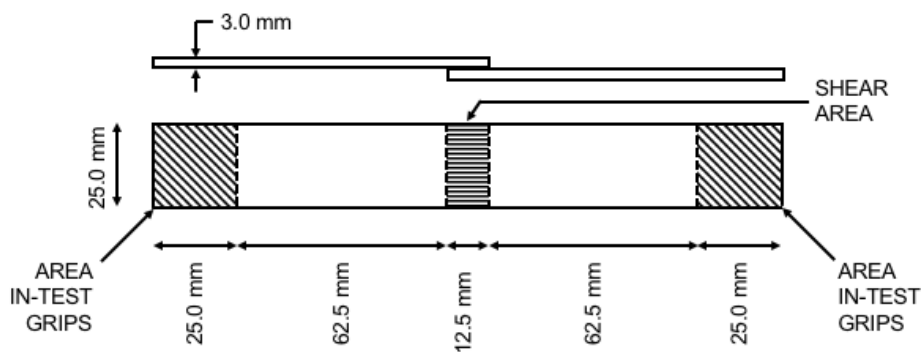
Arrangement and dimensions of a single-lap shear specimen test.
